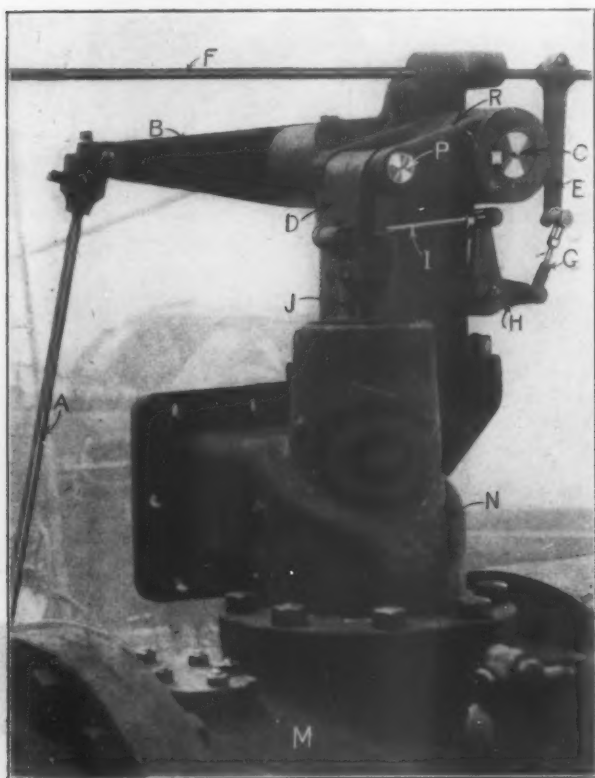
The New Gas Engine Inlet Valve Gear, Patented by J. M. Jenckes, Providence, R. I.
